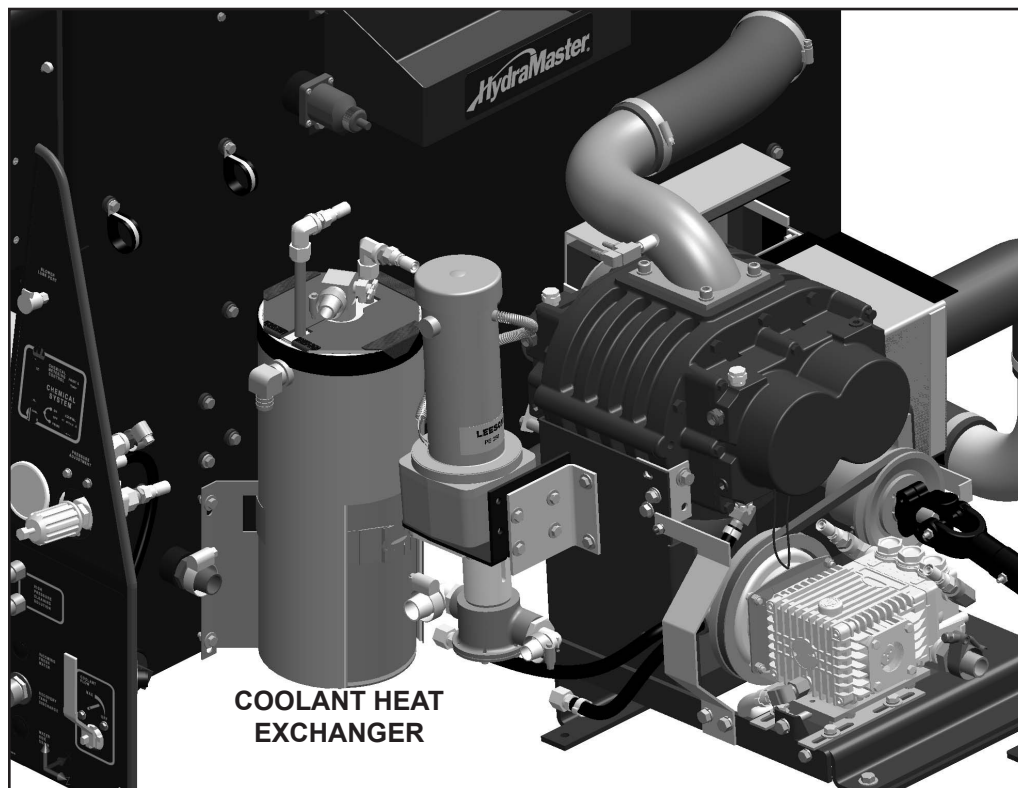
Dry Fit Coolant Heat Exchanger Assembly
